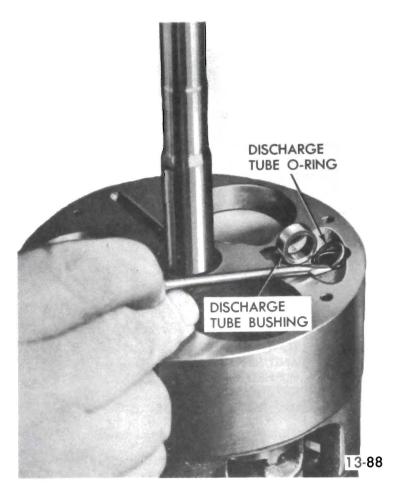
Installing Discharge Tube O Ring and Bushing
